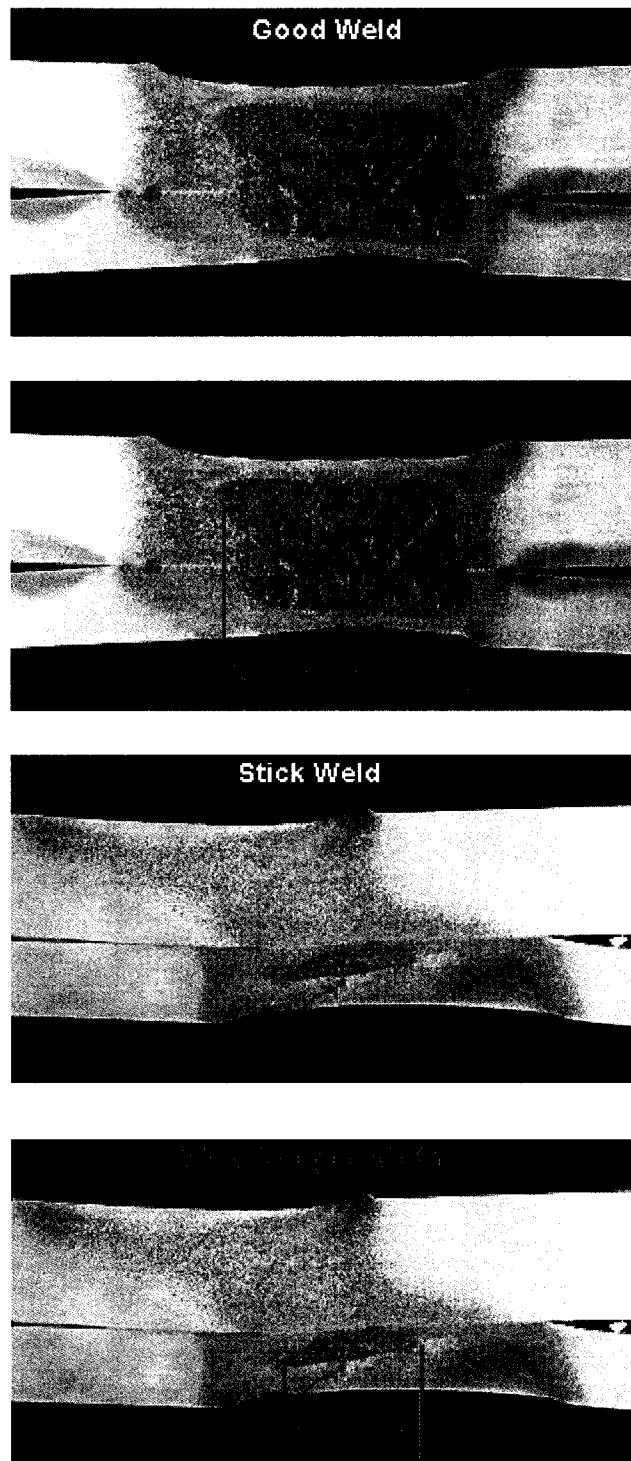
Metallographic cross-sectional views of welds. The top two pictures show a good weld and its effective size; the bottom two pictures show a bad weld with weak adhesion strength.
